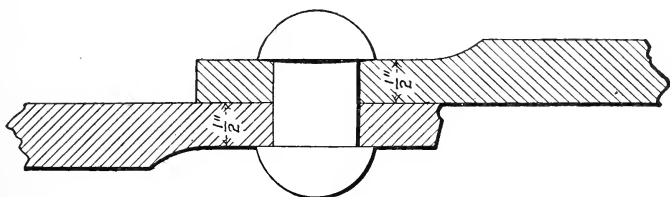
CIRCUMFERENTIAL JOINT FOR THICK PLATES OF HORIZONTAL RETURN TUBULAR BOILERS
